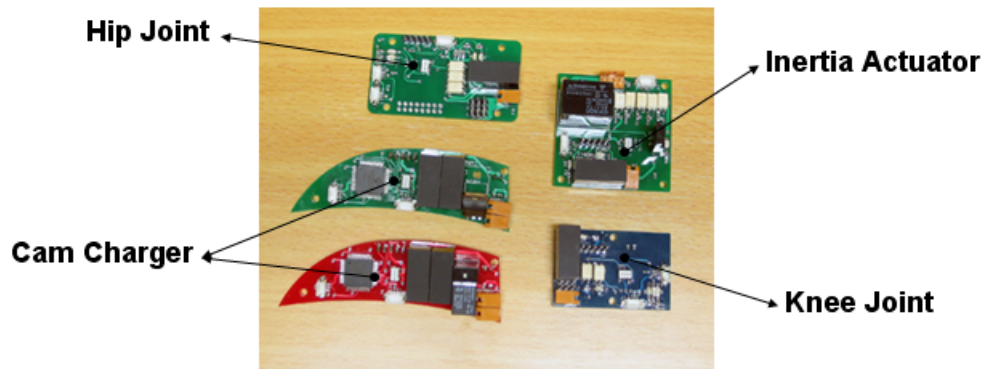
The developed control boards of Inertia Actuator, Hip joint, Knee joint and Cam Charger.
